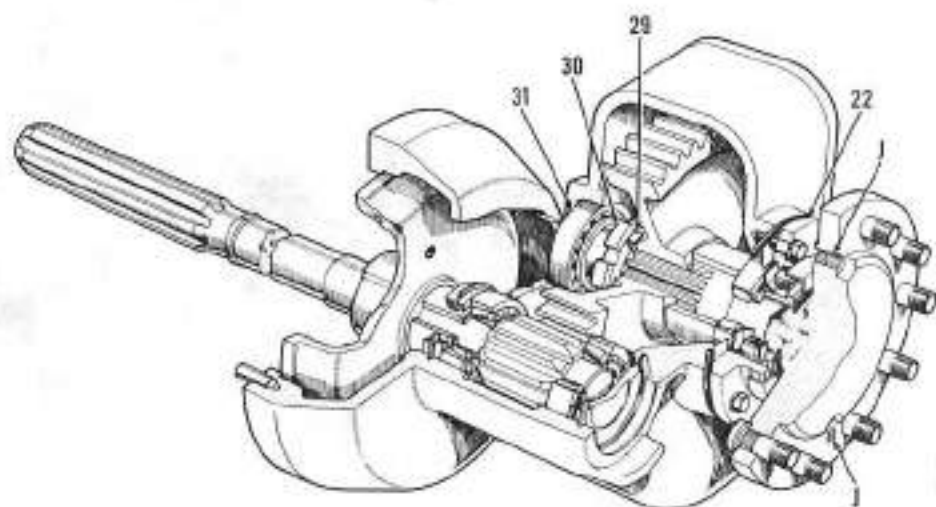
Cut-away view of final drive showing wheel axle shaft and component parts typical of all models. Jack screw holes are shown at (J). Refer to Fig. 132 for legend.
